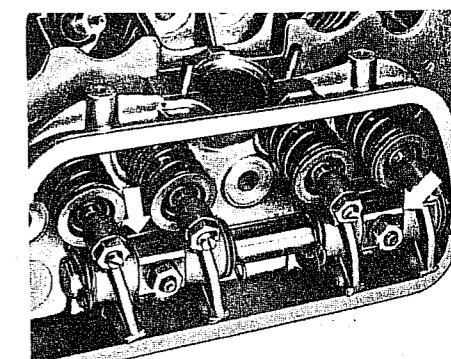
The slotted rocker shaft supports must be installed with the slots upwards and the chamfered edges outwards.
